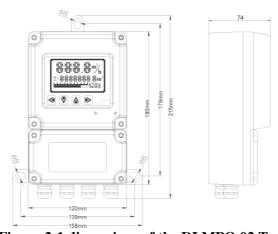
dimensions of the DI.MPO 02 Transmitter
